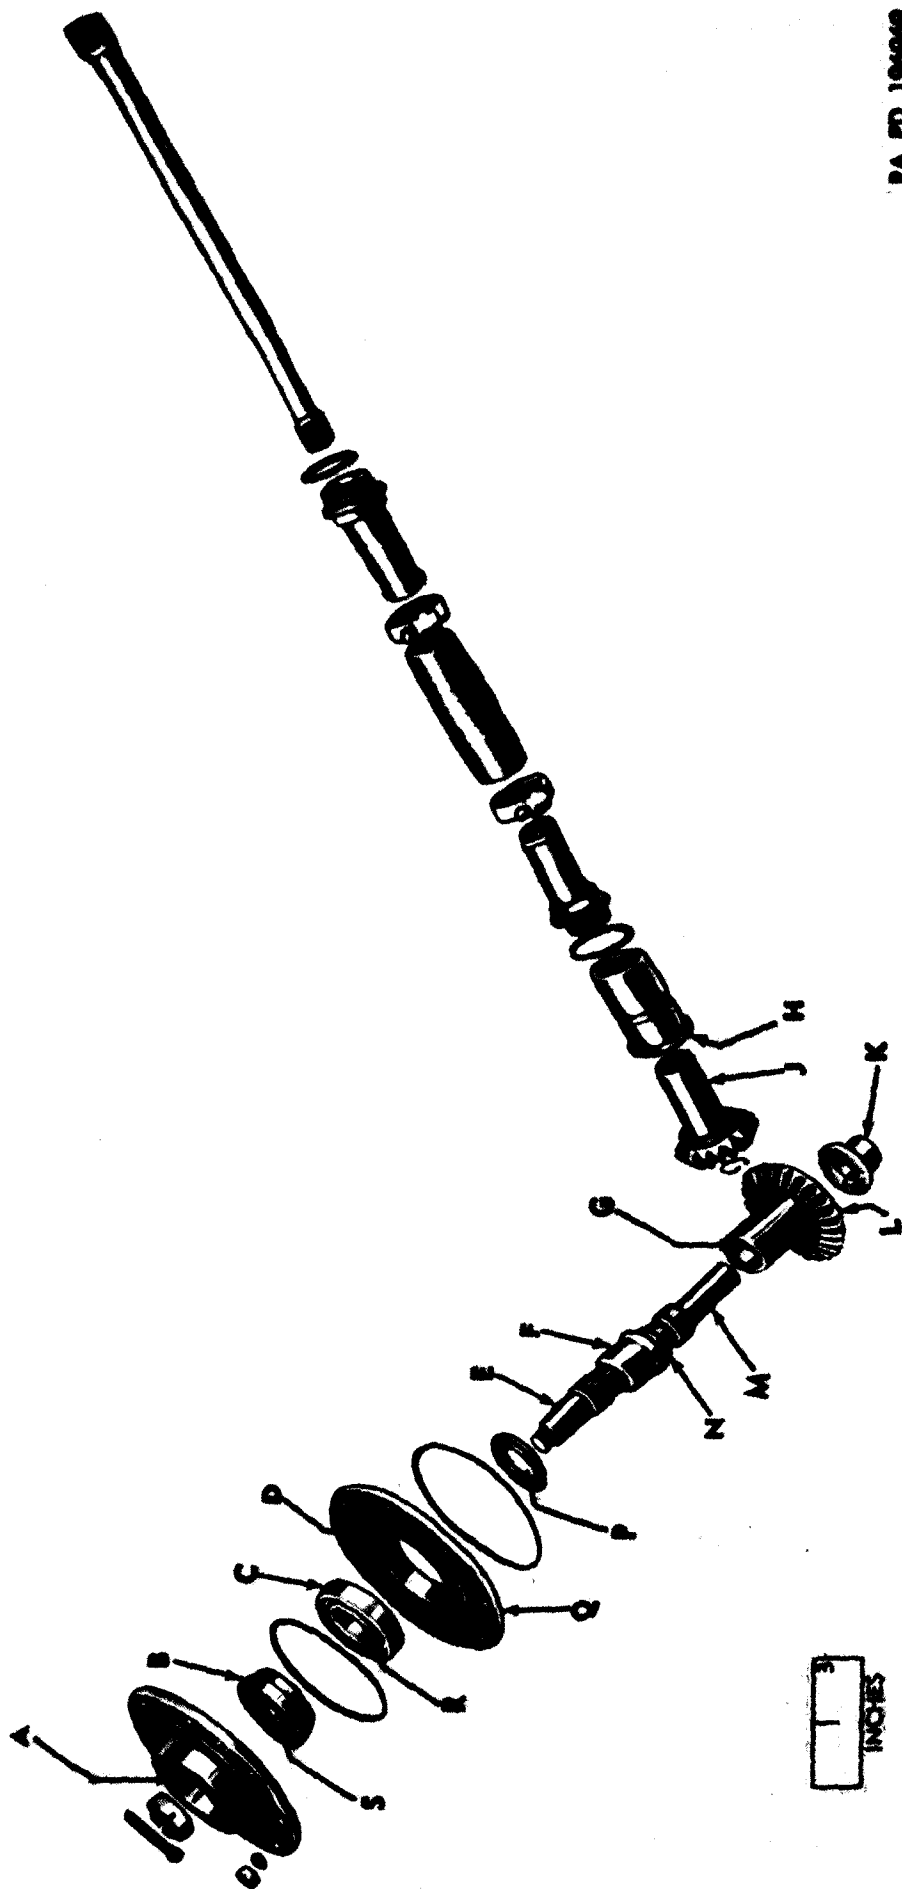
Repair and rebuild standard points of measurement for cooling fan drive.
